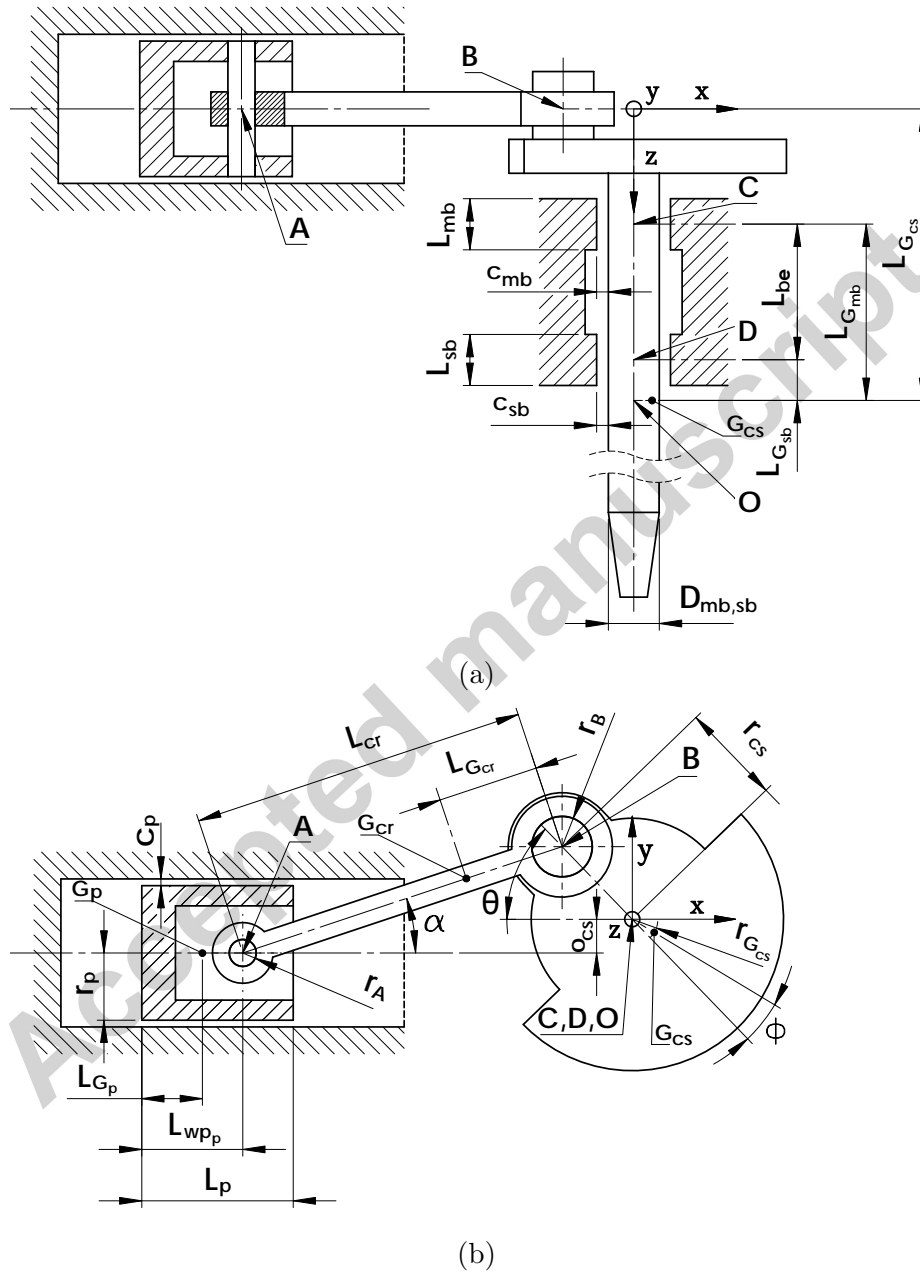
(a) Front view and (b) top view of the reciprocating compressor and its geometry.
